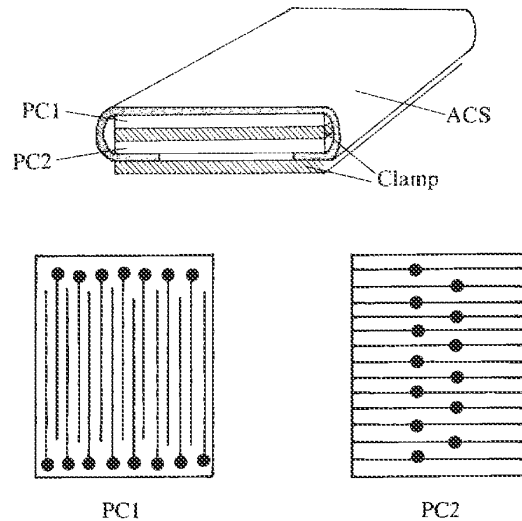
Mechanical drawing of touch sensor. ACS = anisotropically conductive silicone rubber; PC = printed circuit board.
